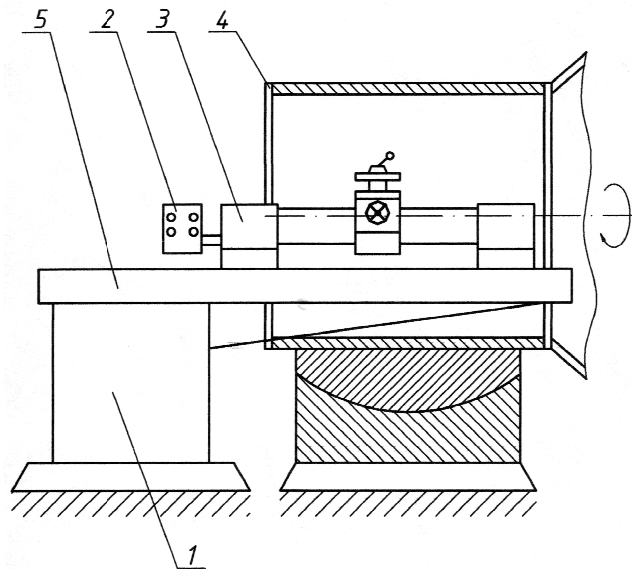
The scheme of installation of the special auxiliary machining module for processing the inner surface of the axle: 1 – power table; 2 remote control; 3 – machines; 4 – axle; 5 – plate
